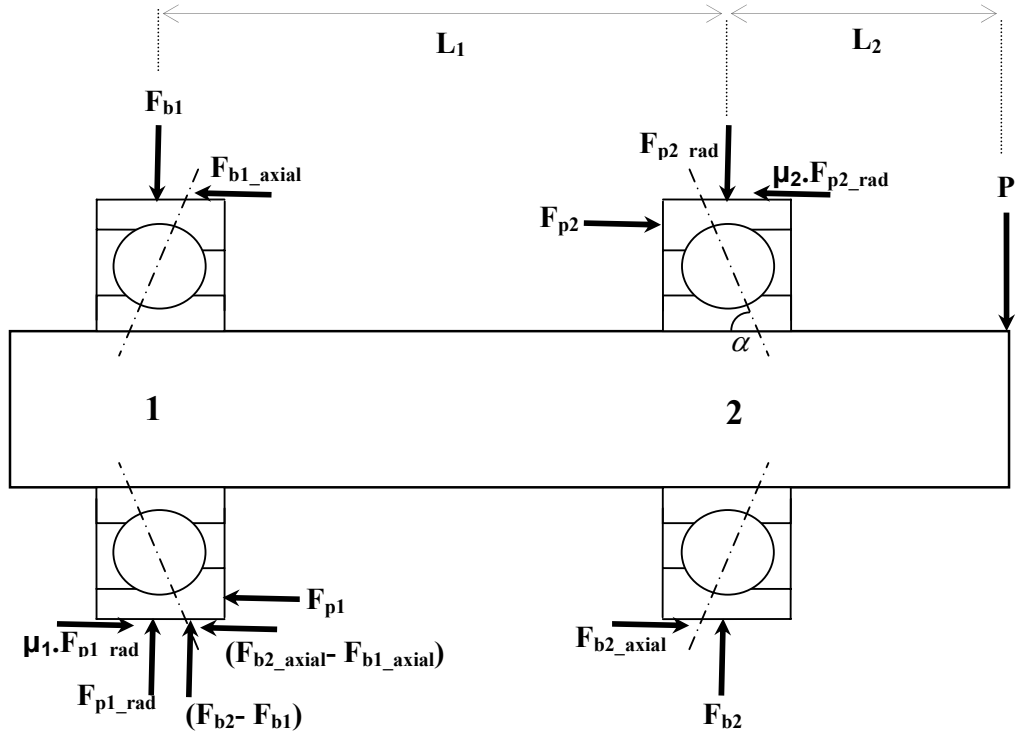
Free body diagram of the shaft supported with angular contact ball bearings.
